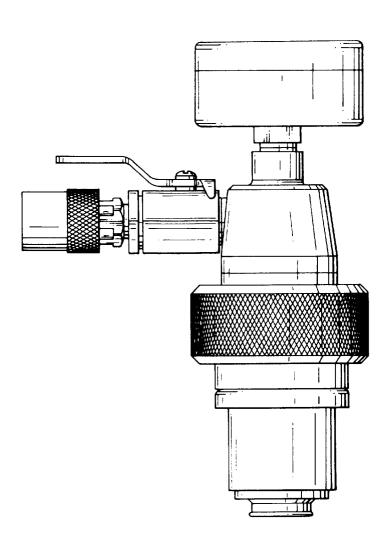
is a left side view of the apparatus for leak testing and refilling automotive cooling systems using vacuum.
